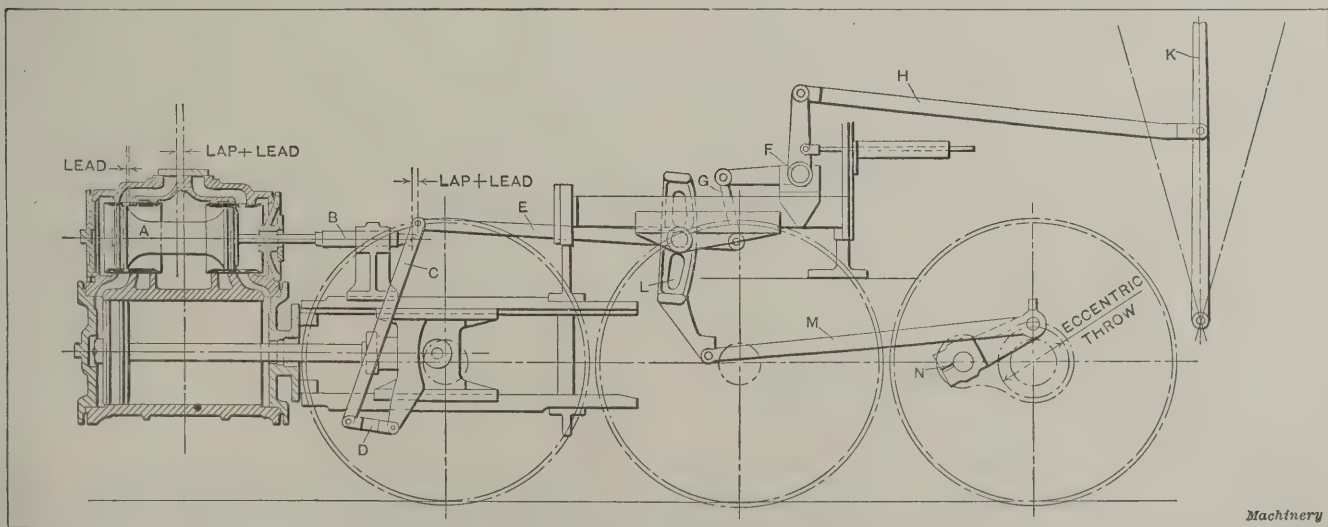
Walschaerts Valve Gear arranged for Inside-admission Piston Valves
